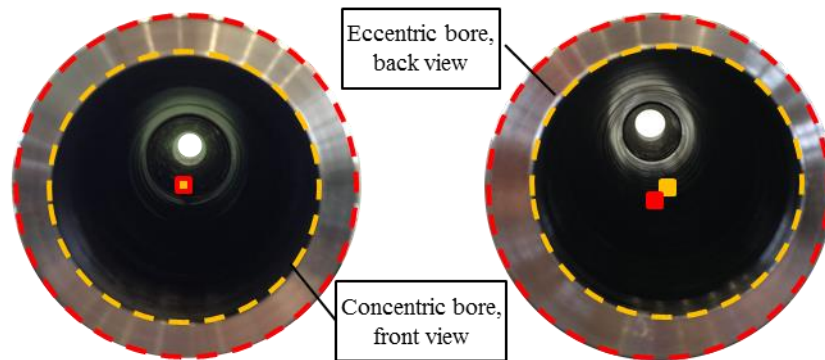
Result after the deep-hole drilling of Inconel 718 housing with a drilling depth of 2 m, offset of the bore
